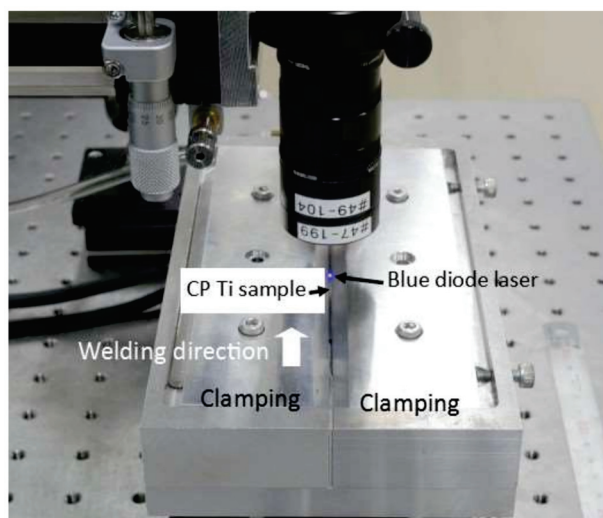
Blue diode laser (BDL) welding set up.
